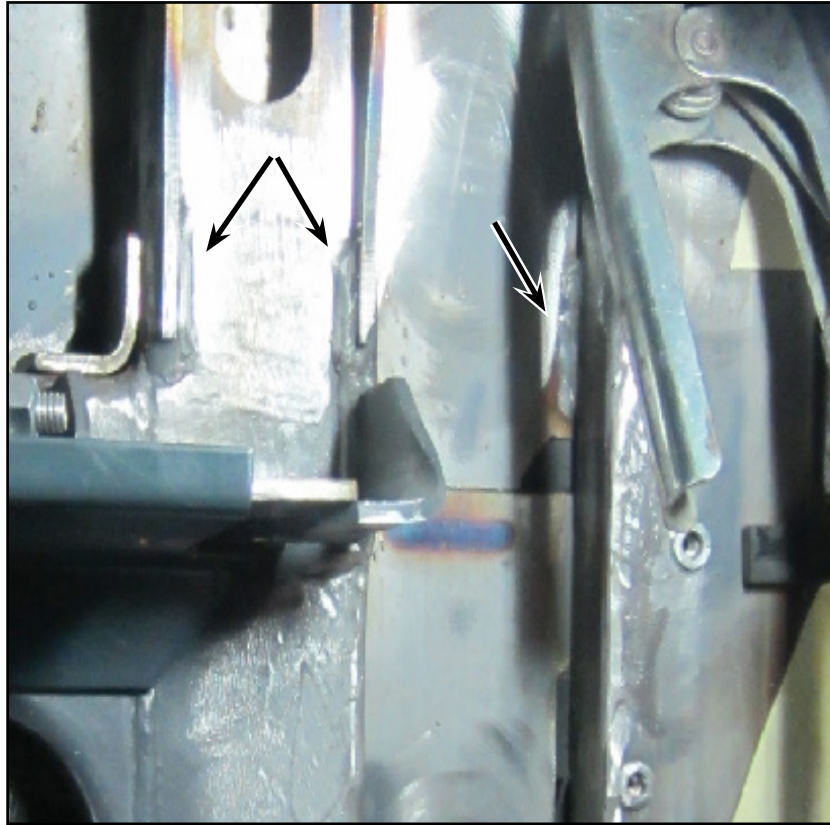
Examples of Weld Beads that May Need to be Ground (Not Limited to These)
